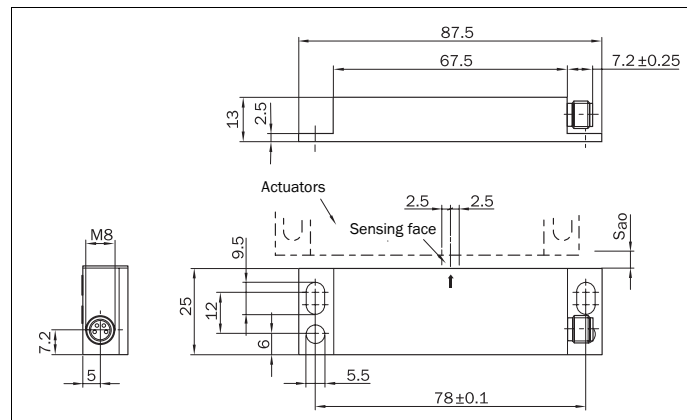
Dimensional drawing RE23-DAC magnetic safety switch
